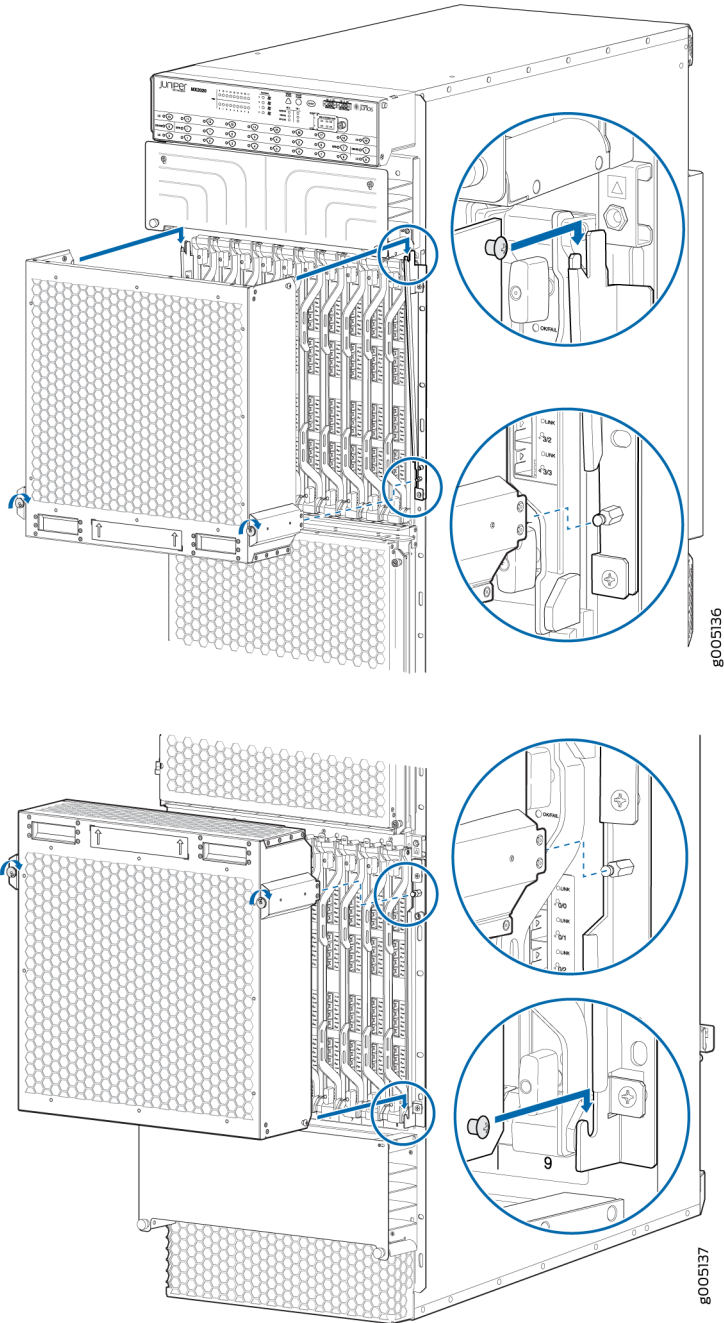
Installing the Extended EMI Cover Mounting Brackets
